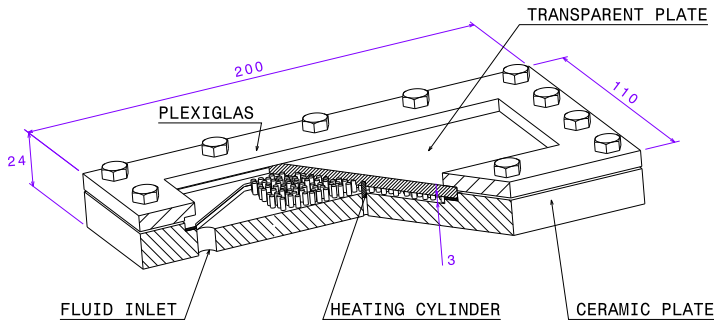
EXPERIMENTAL SETUP: TEST SECTION (DIMENSIONS IN mm).
